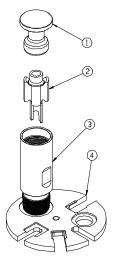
HH46, HH57, HH68 & HH108 Inserting Shock Absorber into End Cap 1-Shock Absorber Pusher, 2-Shock Absorber with Valve Guide, 3-End Cap, 4-Press Plate Assembly
